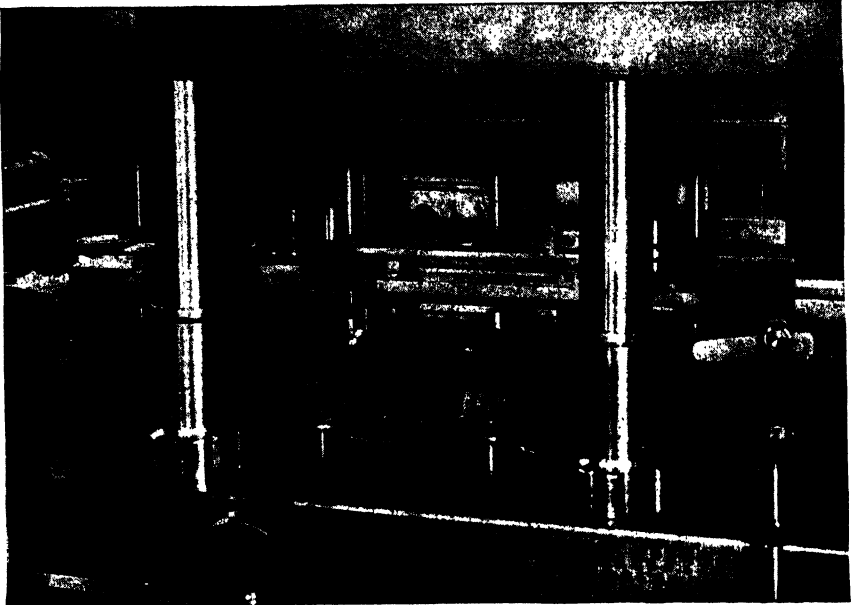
Close-up front view of the cut-and-carry progressive die shown in the Dieing machine, Fig. 99. (Courtesy of The Henry & Wright Mfg. Co.)
